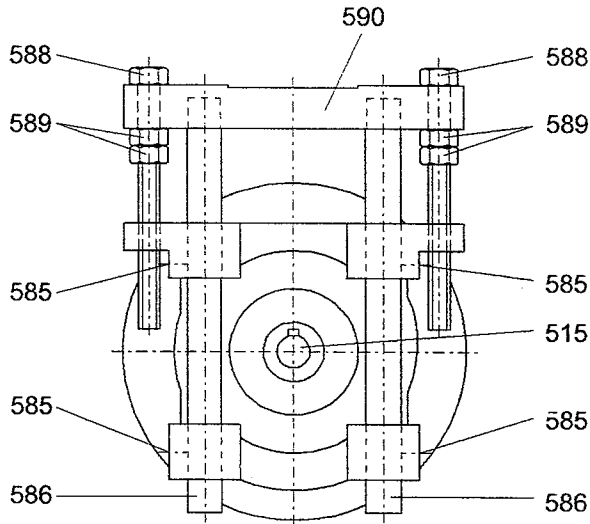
Mounting motor bedplate IEC motors sizes 132 to 200
